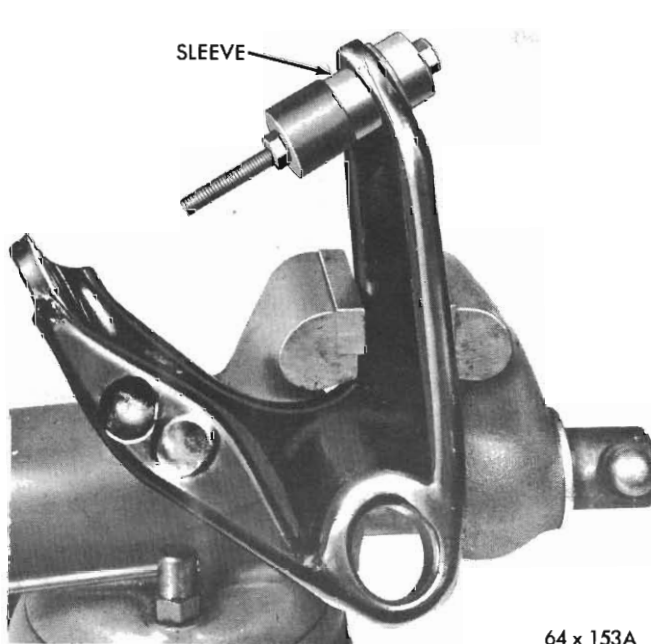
Installing upper control arm bushing (Tool E2C25A)
